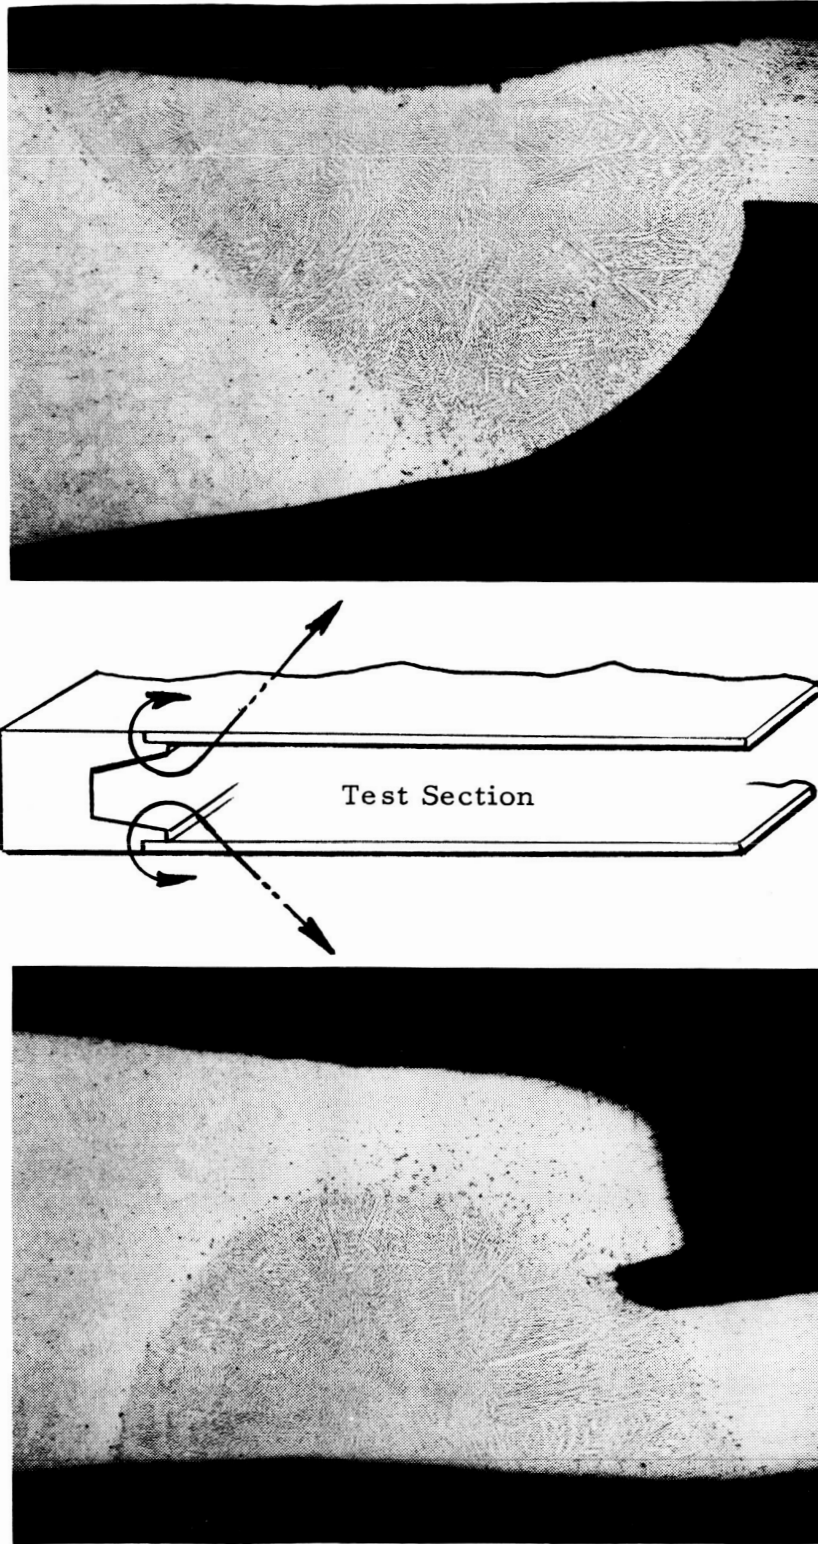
20 X Macro Cross Section Photograph of the TIG Fusion Welded Aft Ring Joint
